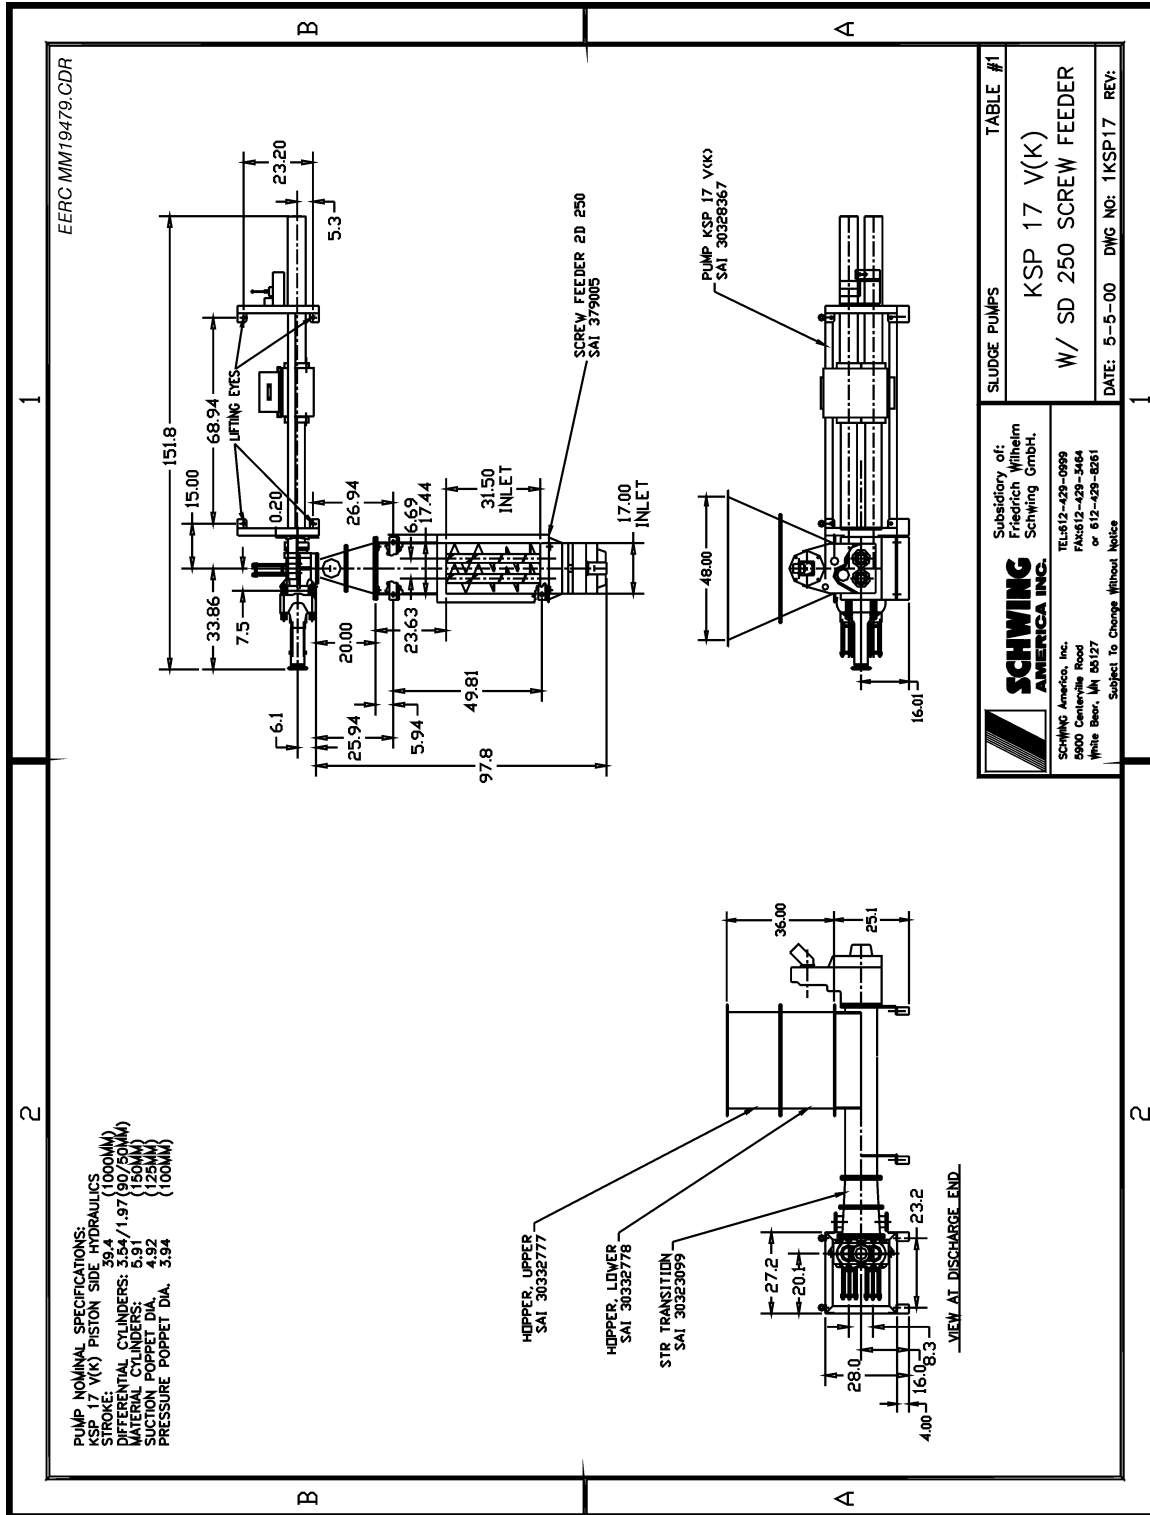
Schwing America high-solids sludge pump with twin-screw feeder.
